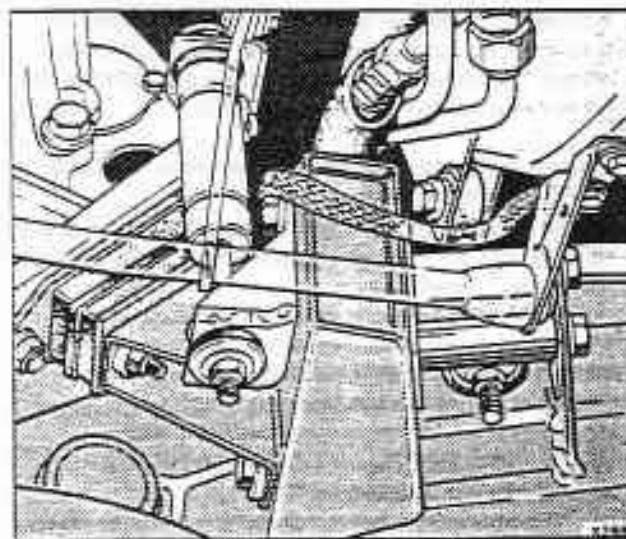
Sub-frame to engine damper (early cars shown)
